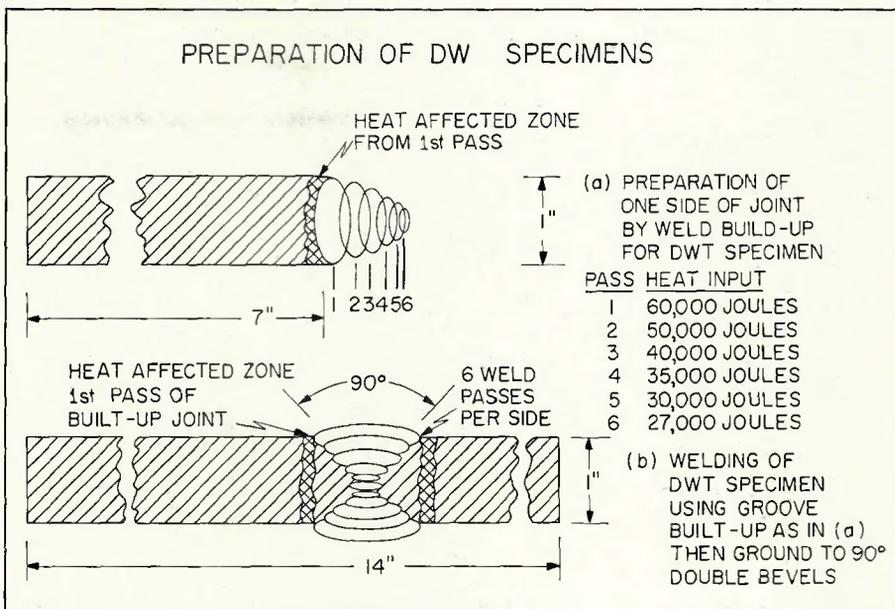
Welding and preparation of DW specimens. Similar procedure was used for DT specimens
